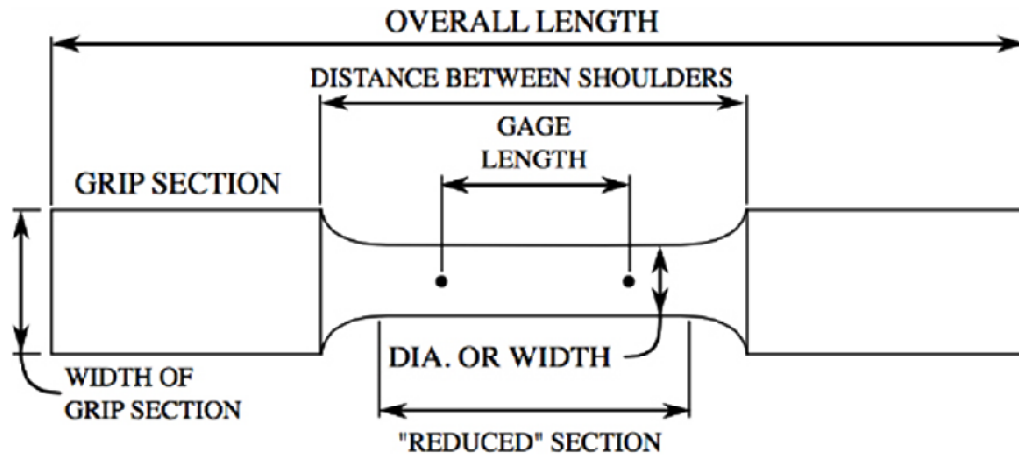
Schematic and dimensional measurement of tensile test specimen
